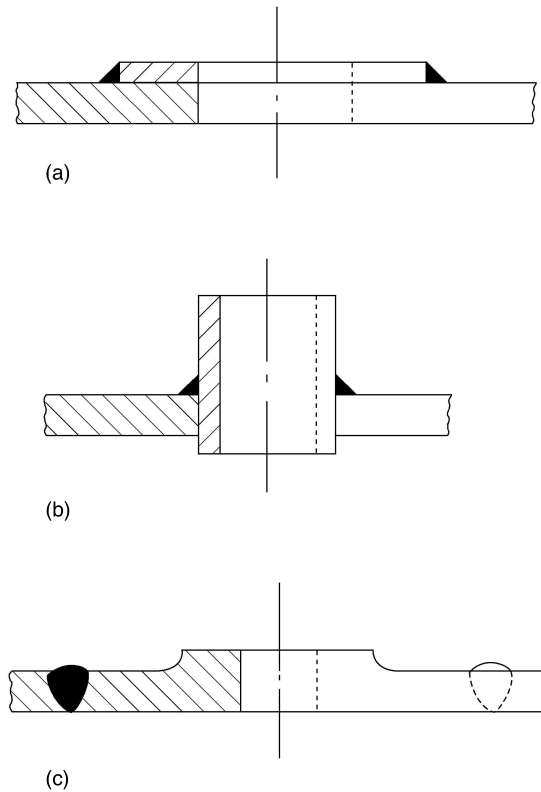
Types of compensation for openings (a) Welded pad (b) Inset nozzle (c) Forged ring
